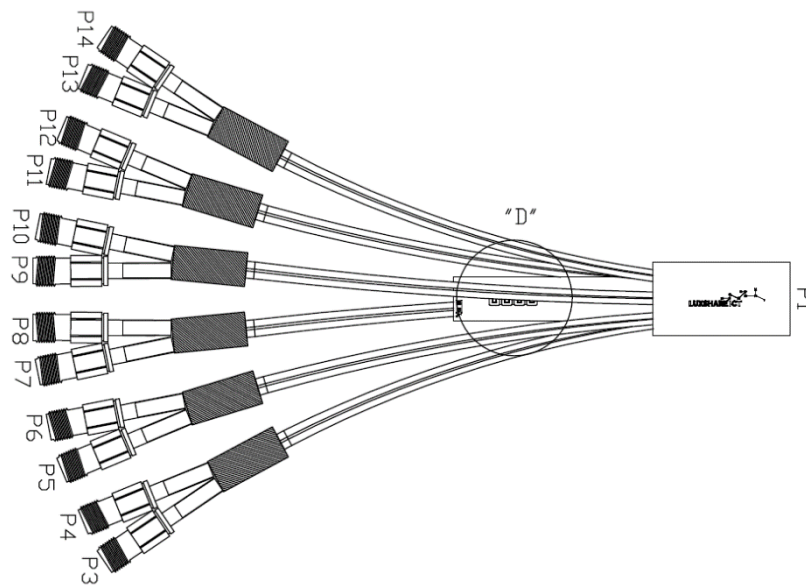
USB Type-C Receptacle Alt mode Fixture TF21-189G
